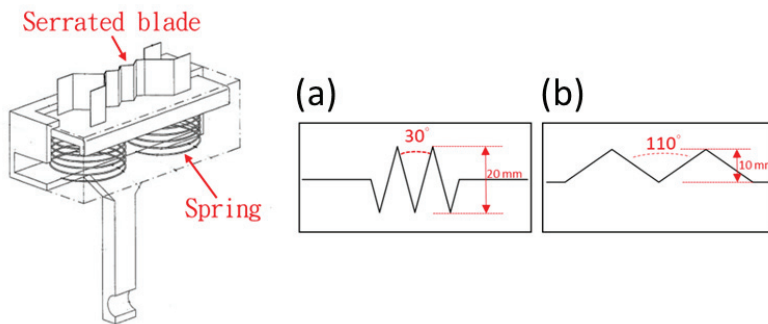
A schematic of a cutting tool for dried longan pulp. (a) A cutter with the blade width of 20 mm and 30° serrated bending angle. (b) A cutter with the blade width of 10 mm and 110° serrated bending angle.
